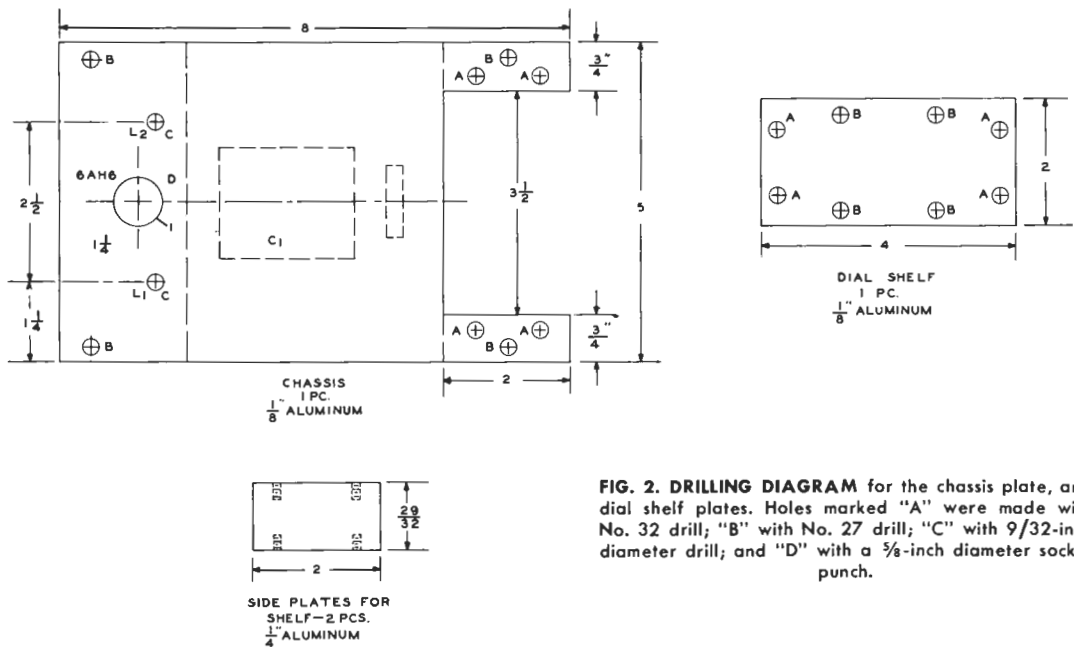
DRILLING DIAGRAM for the chassis plate, and dial shelf plates. Holes marked "A" were made with No. 32 drill; "B" with No. 27 drill; "C" with 9/32-inch diameter drill; and "D" with a 5/8-inch diameter socket punch.
